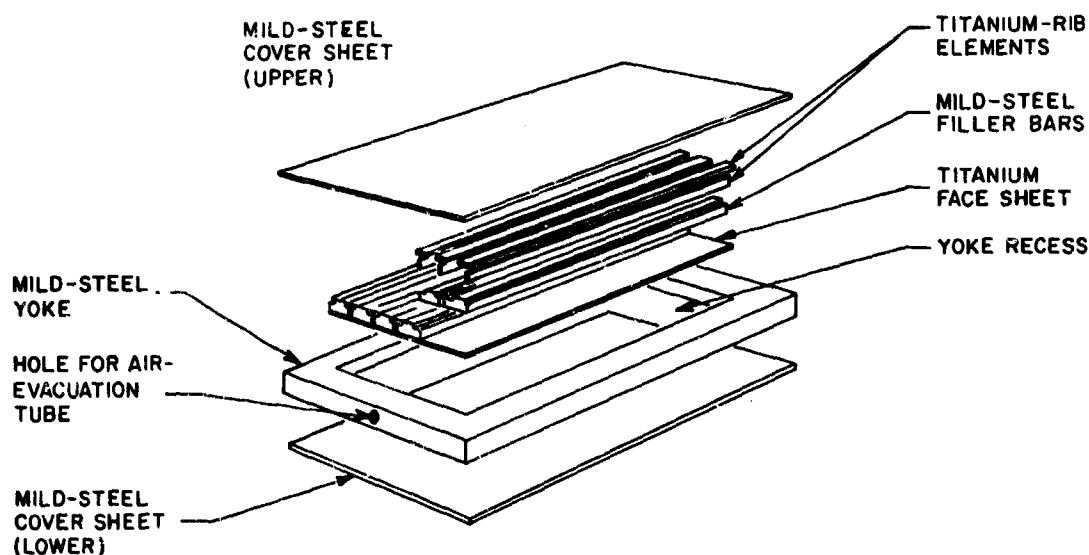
Pack Assembly of Structure-Stiffened Panel for Roll Welding<sup>88</sup>
